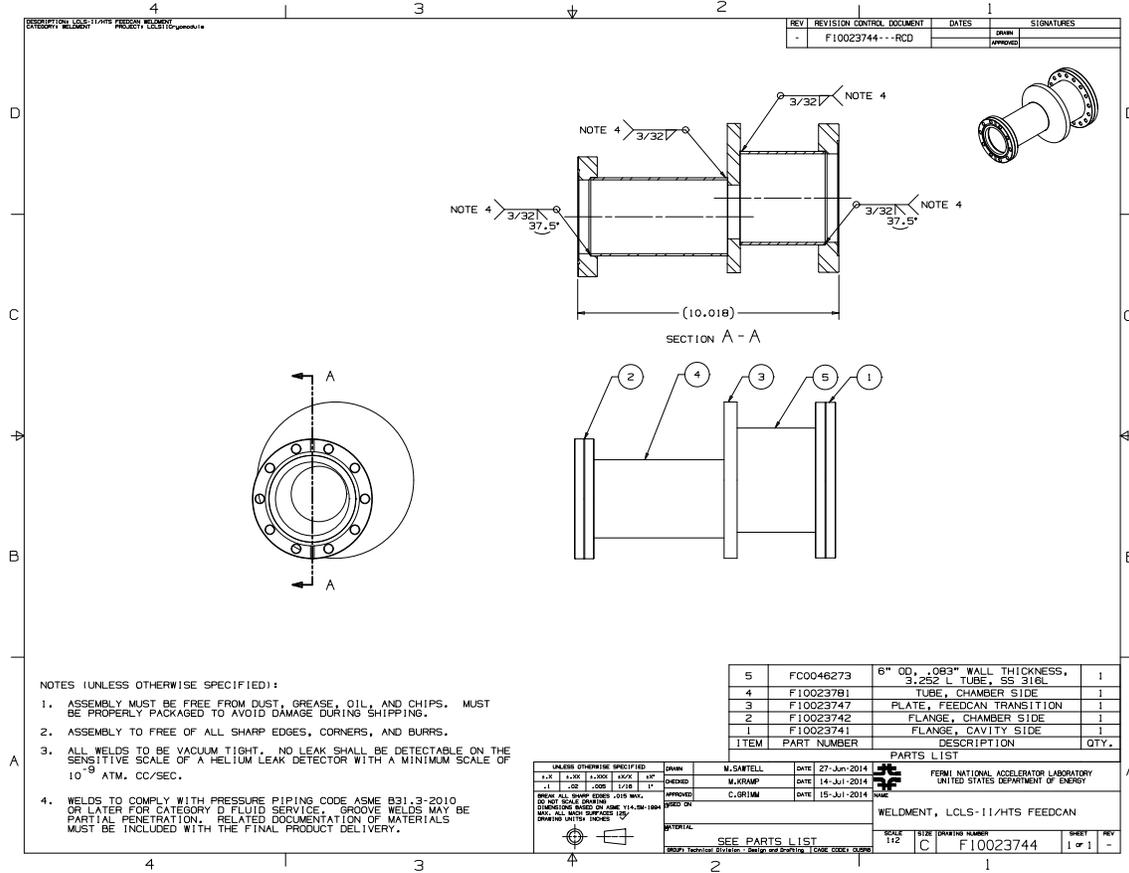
HTS LCLS-II Helium Vessel adapter weldment
